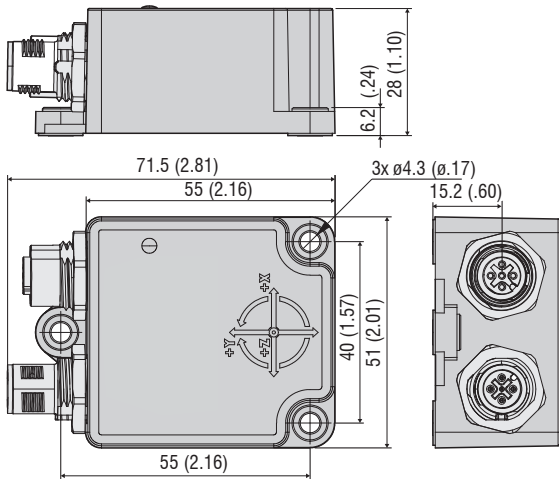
Dimensional INC5502D-360/90-P-OS, dimensions in mm (inches, rounded off)
